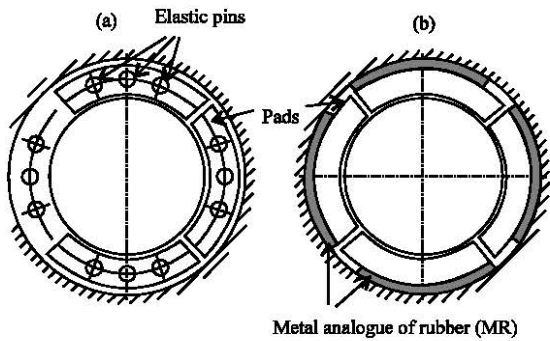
Tilting-pad journal bearing with elastic suspension of pads; a) With pads on elastic pins and b) With an elastic suspension of pads made out of metal analogue of rubber
